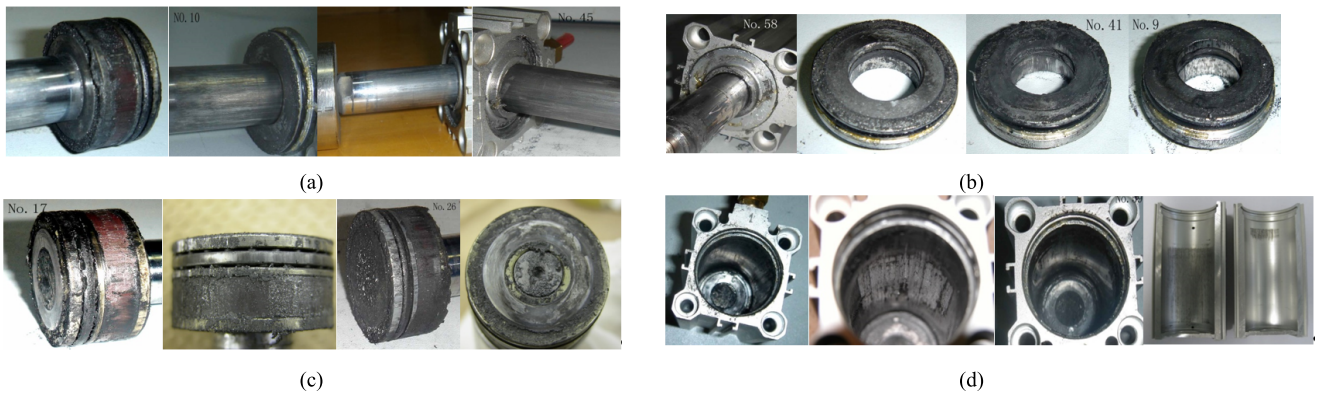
Observed field failures. (a) Piston rod scratch. (b) Parking seal wear. (c) Piston seal wear. (d) Cylinder tube debris.
